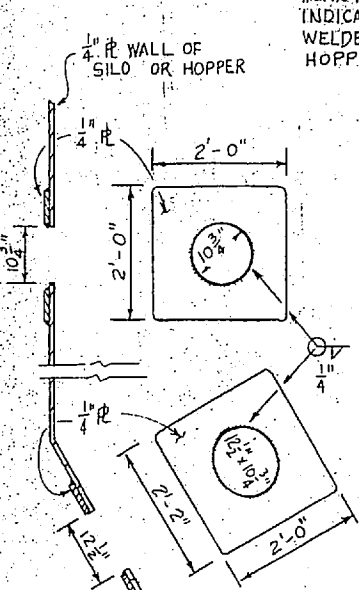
DETAILS - DUST COLLECTOR MOUNTING TYPICAL
